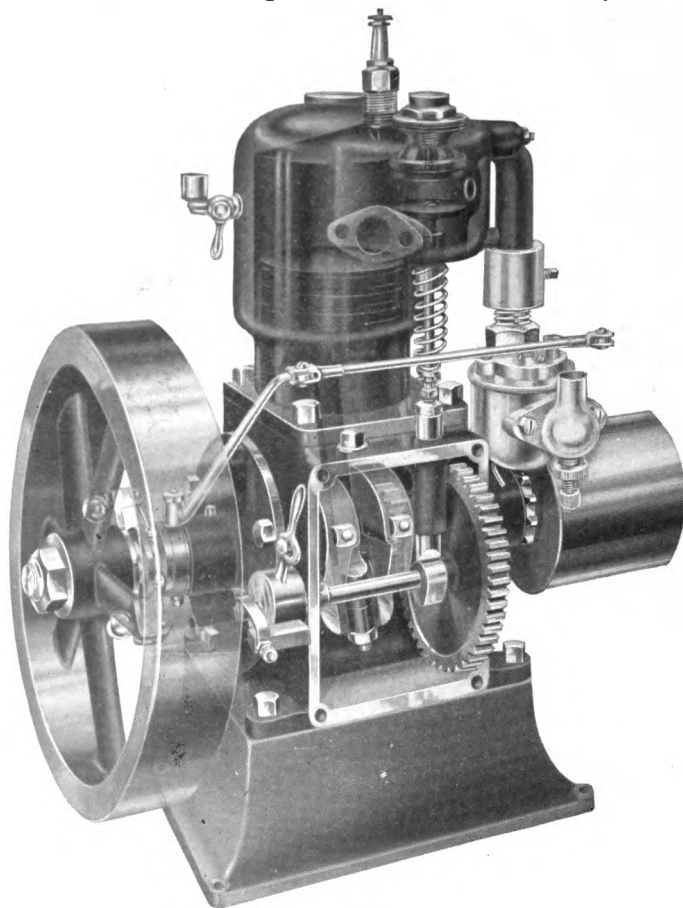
Cushman Farm Engine with Crank Case Cover Removed.
